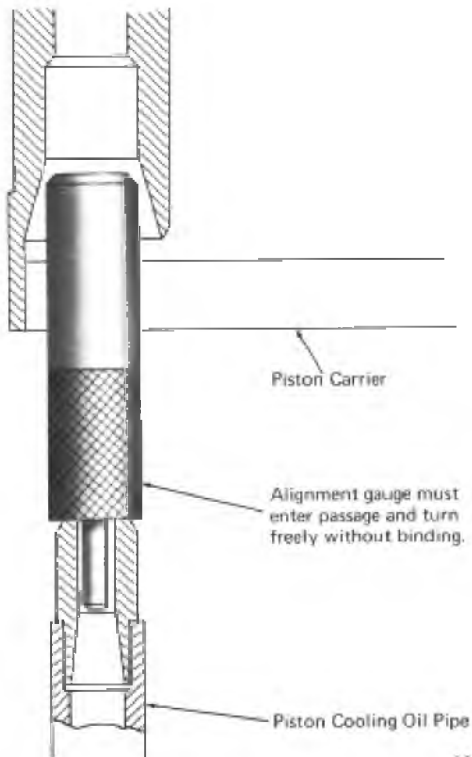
Piston Cooling Oil Pipe Alignment
